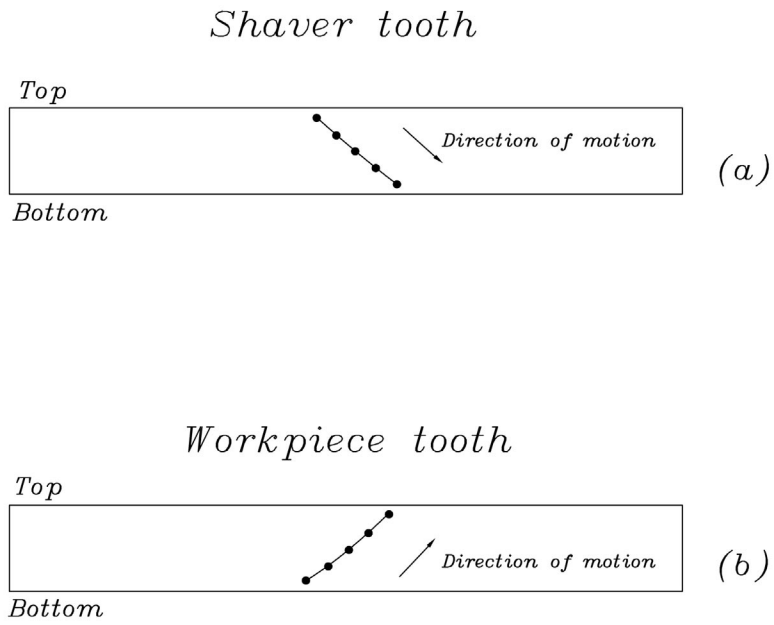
Contact paths on shaver and workpiece tooth surfaces.
